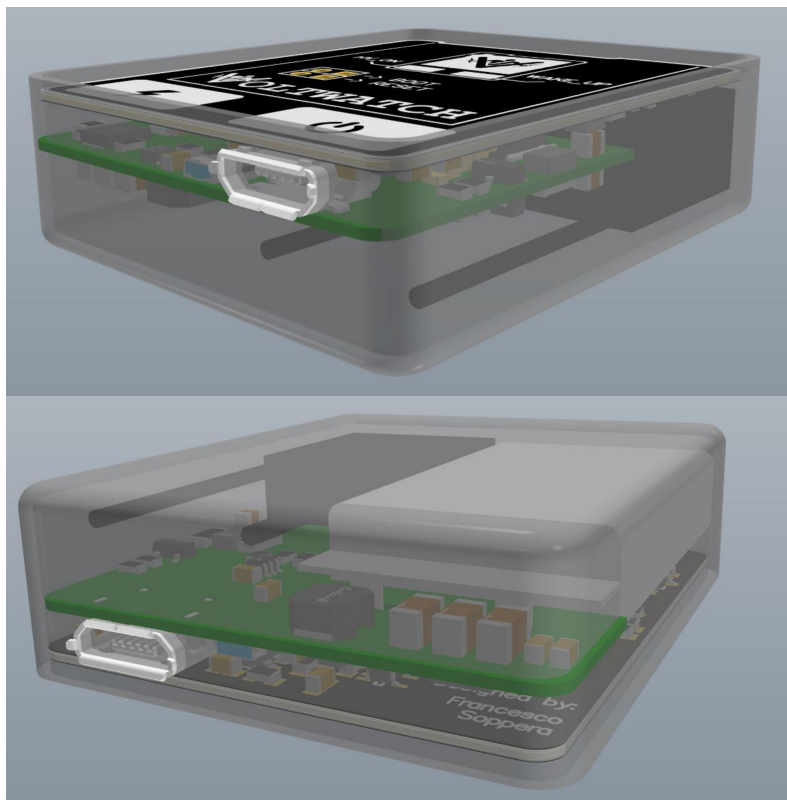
3D assembly of the device, including the CASE: the case is not refined yet and needs to be improved, but it's enough to check for proper internal electronics fitting
